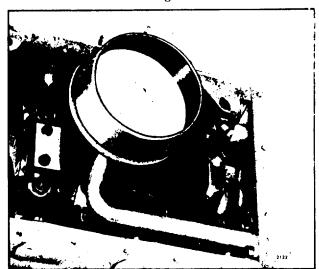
Typical Oil Pump Inlet Pipe and Screen Mounting
